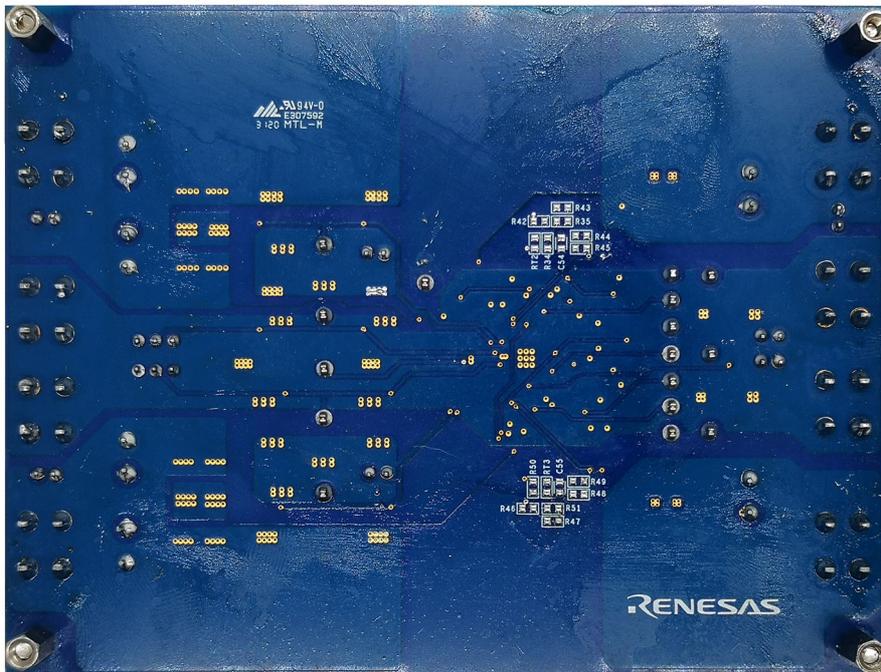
ISL81805EVAL2Z Evaluation Board, Bottom View
